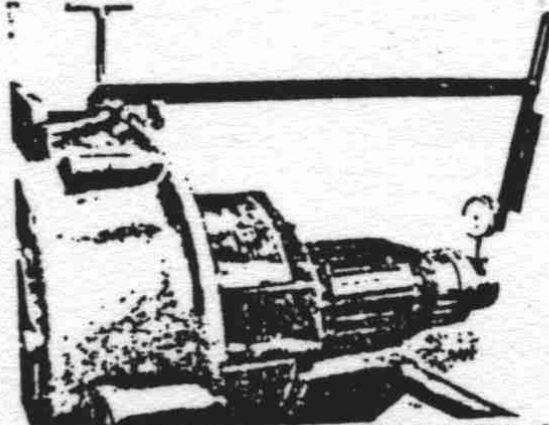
CHECKING ROTOR ALIGNMENT WITH DIAL GAUGE
